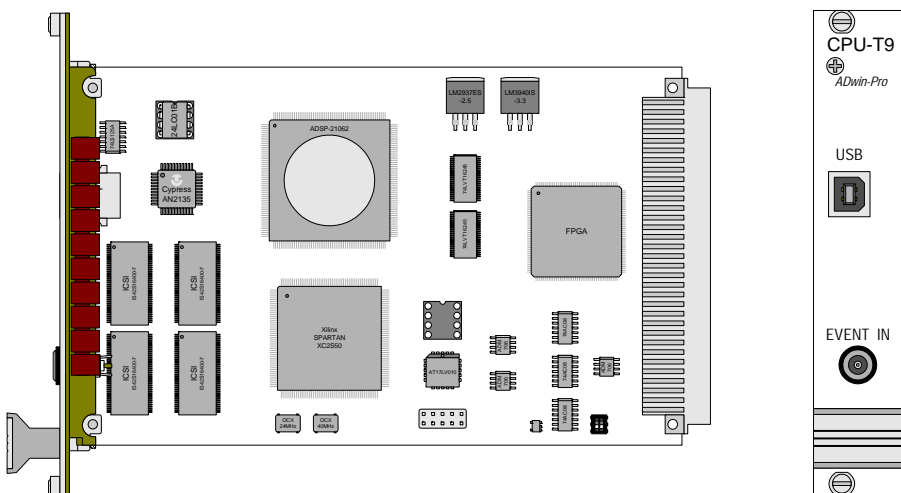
Pro-CPU-T9-USB: Board and front panel
